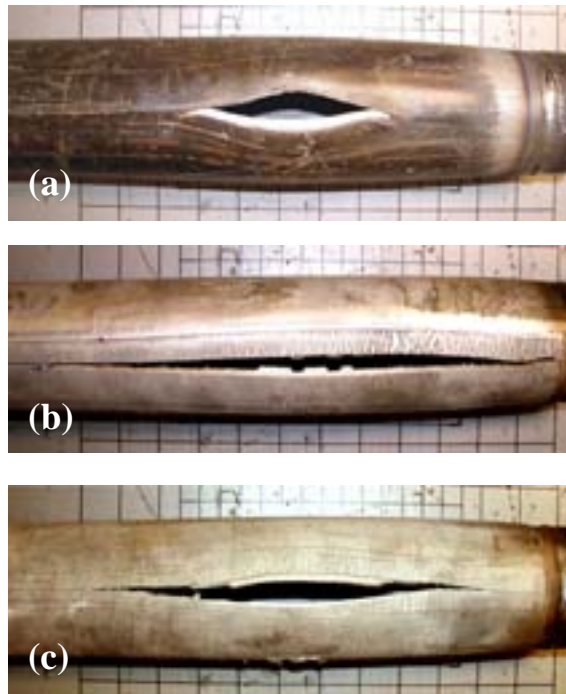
Boiler tube sections after hydrostatic burst test. (a) Control (b) As-brazed (c) Brazed and Normalized.
